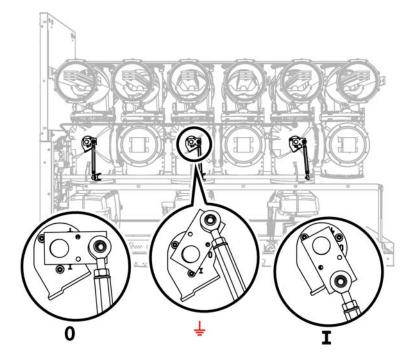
Rear position indicator at the disconnector housing for busbar system 1
